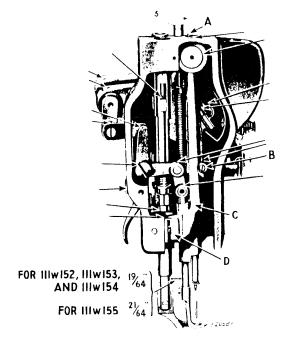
End View of Machine Showing Oiling Points and Adjustments
